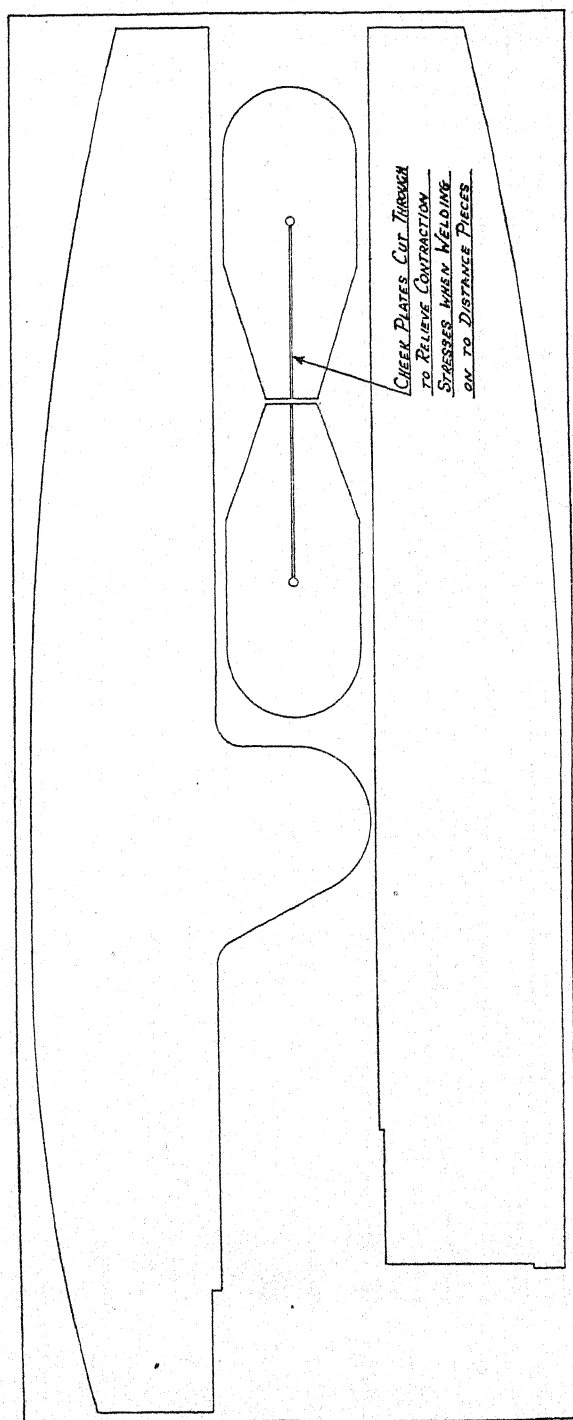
Component parts of riveting machine frames for cutting. See also page 998a.
